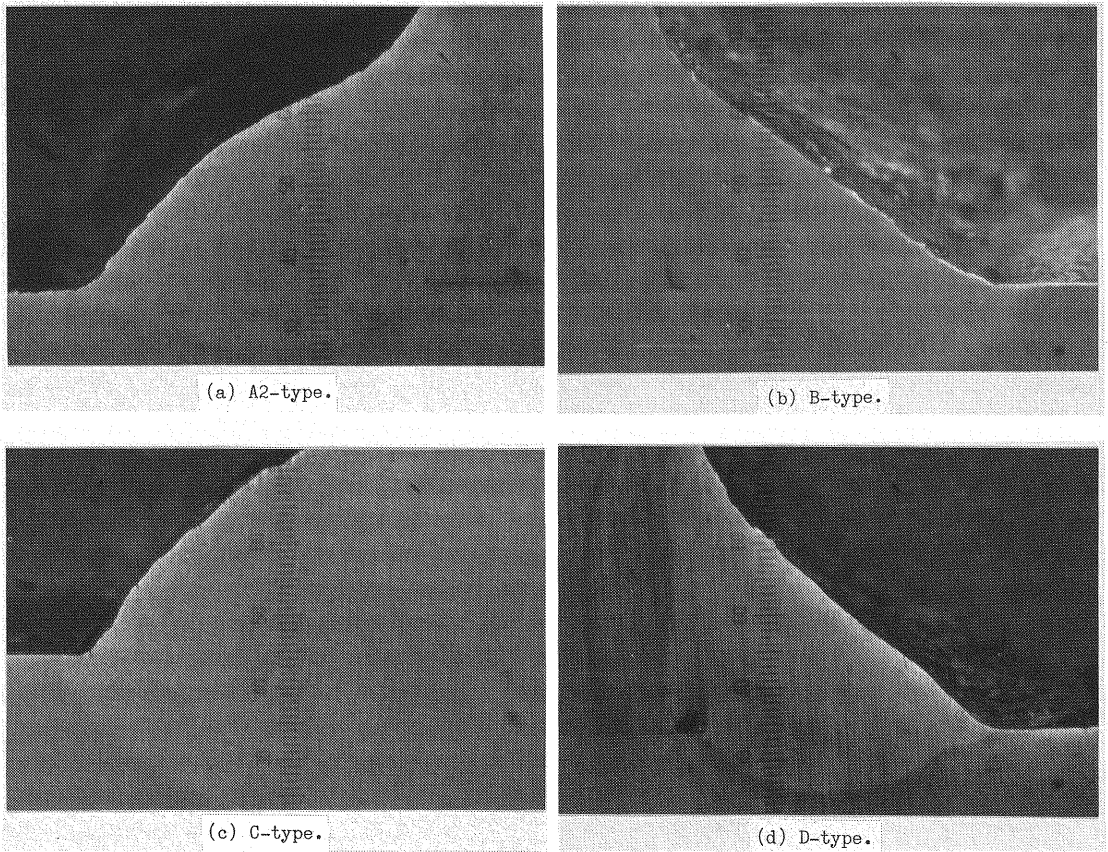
Macrosection of Fillet Weld Toe.
